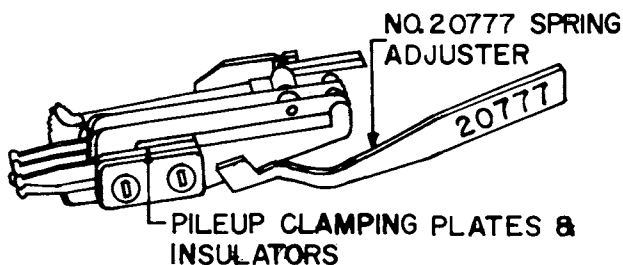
ADJUSTING SPRINGS TO MEET GUAGING
